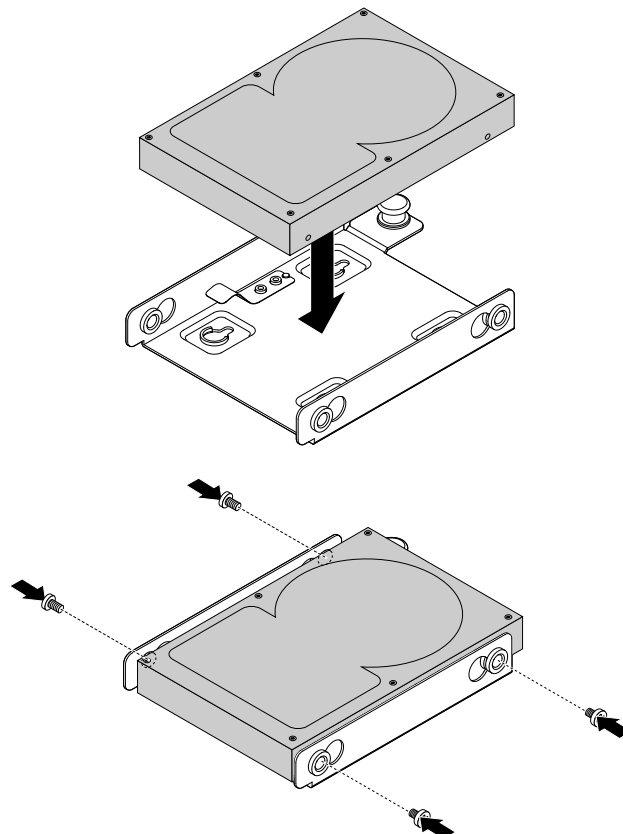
Installing the 2.5-inch hard disk drive to the bracket
